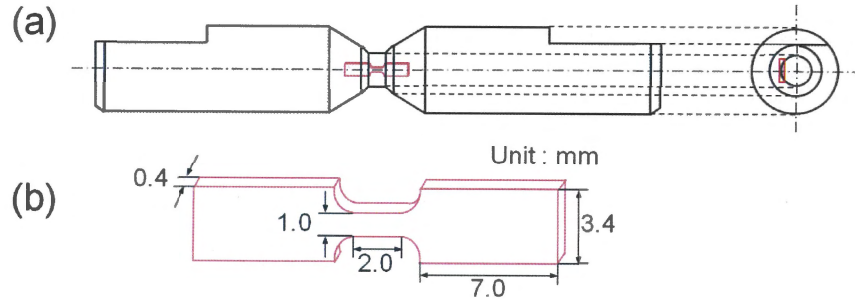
(a) Illustration of the side and top view of the specimen deformed by torsion, showing the position where the tensile specimen was taken. (b) Dimension and shape of the tensile test specimen.
